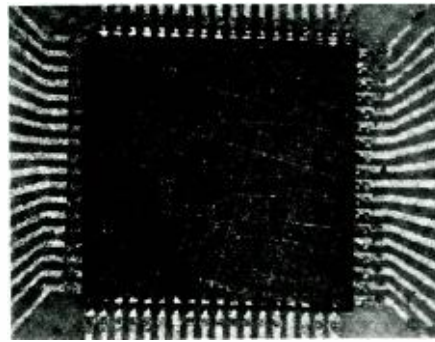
Seventy-two-beam chip bonded to gold-plated refractory-metal pattern.
